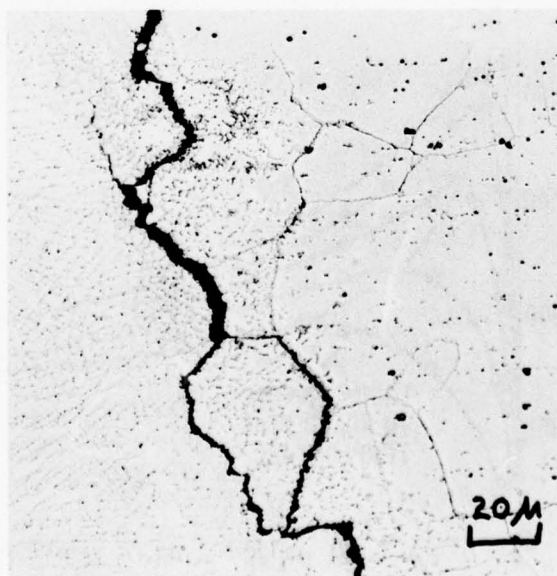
HOT HAZ CRACK IN ALLOY 700 AFTER GAS-TUNGSTEN ARC WELDING.
